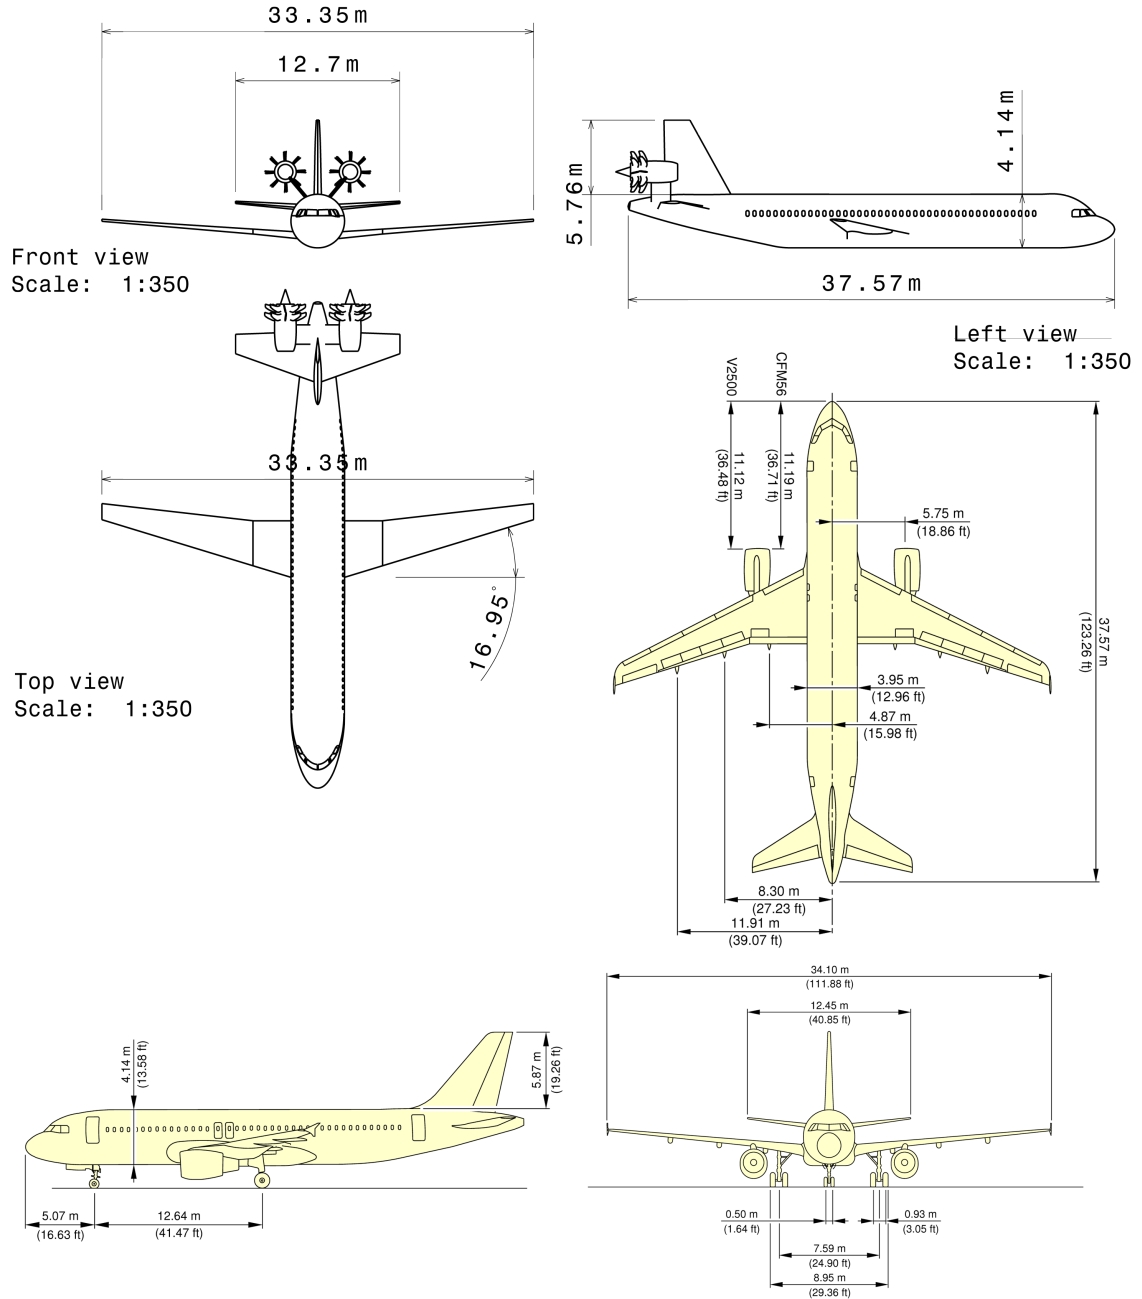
Design drawings with dimensions of the SCALAIR A320 (top left three) and Airbus A320 (yellow bottom right three) [64]
